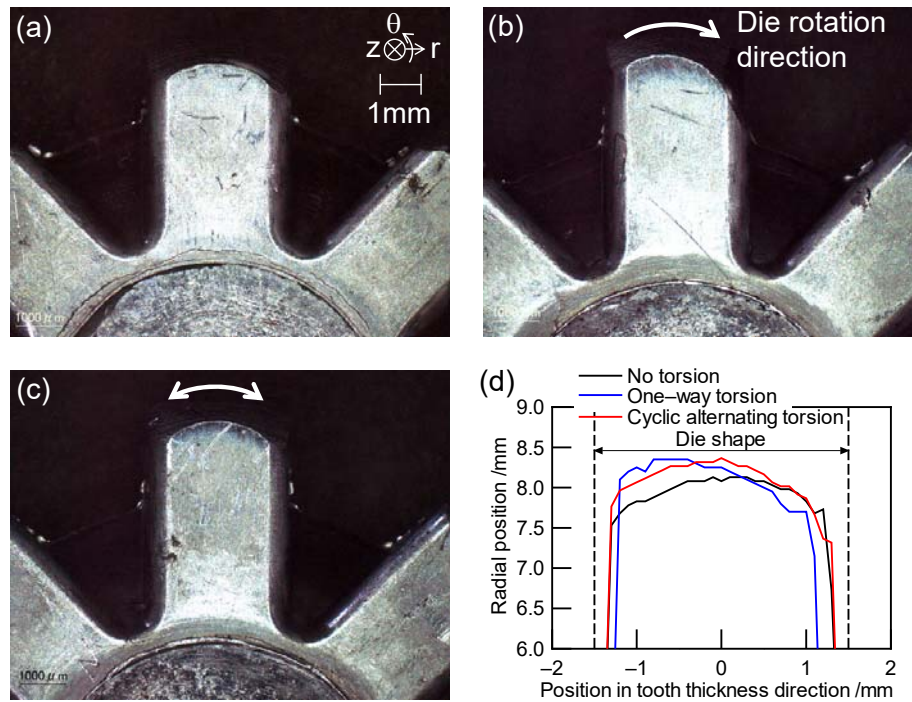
Experimental results of shape of extruded workpiece at tooth part in lateral extrusion with $s = 6.7$ mm; (a) no torsion, (b) one-way torsion, (c) cyclic alternating torsion, (d) tooth profiles.
